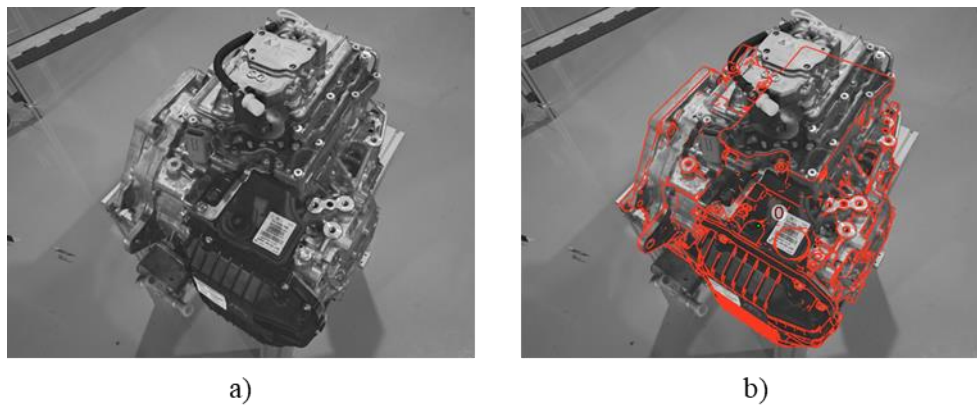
a) Gearbox part, b) Gearbox pose estimation using CADMatch
